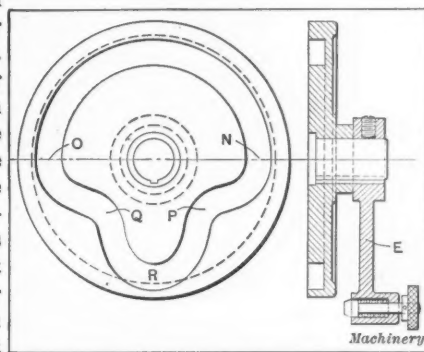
Cam Mechanism for changing the Cutter Speed Gears
